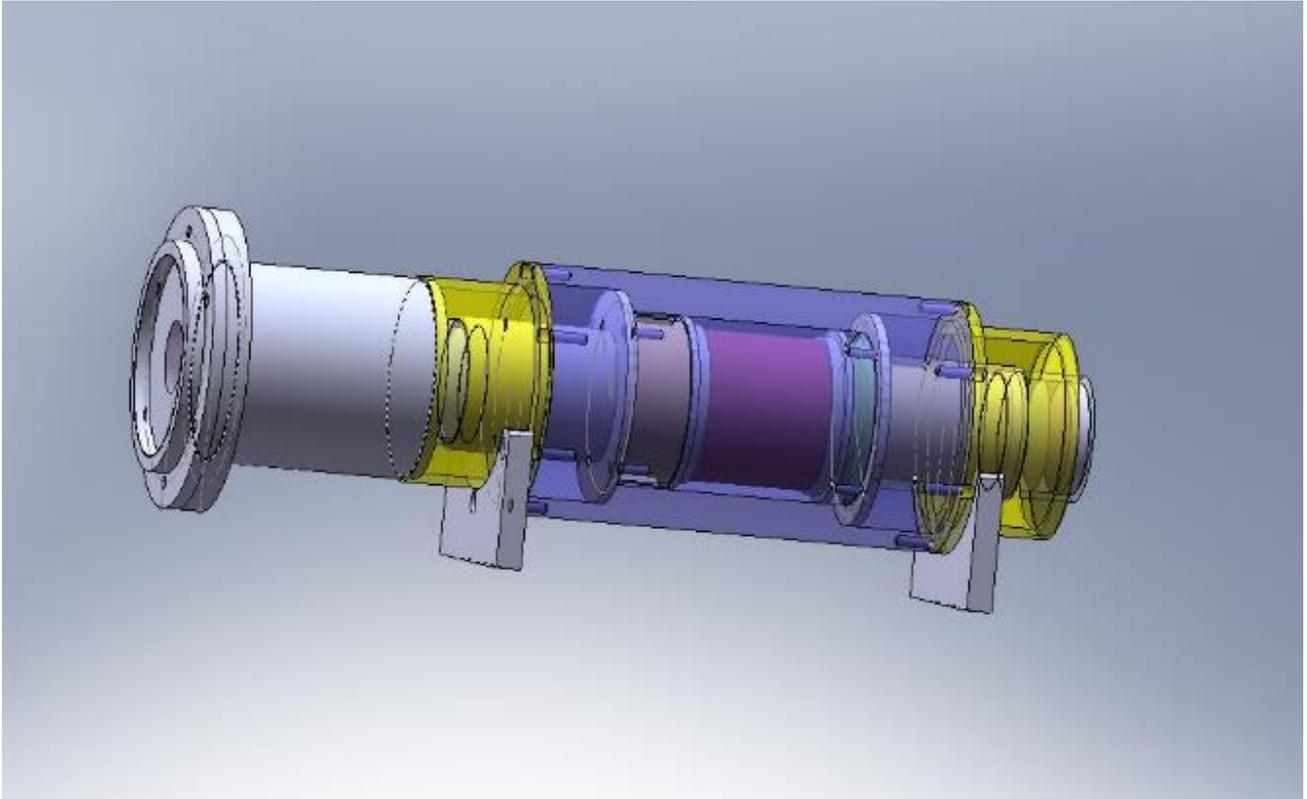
Opto-mechanical CAD drawing of the case of the Lyot Liquid Crystal Filter.
